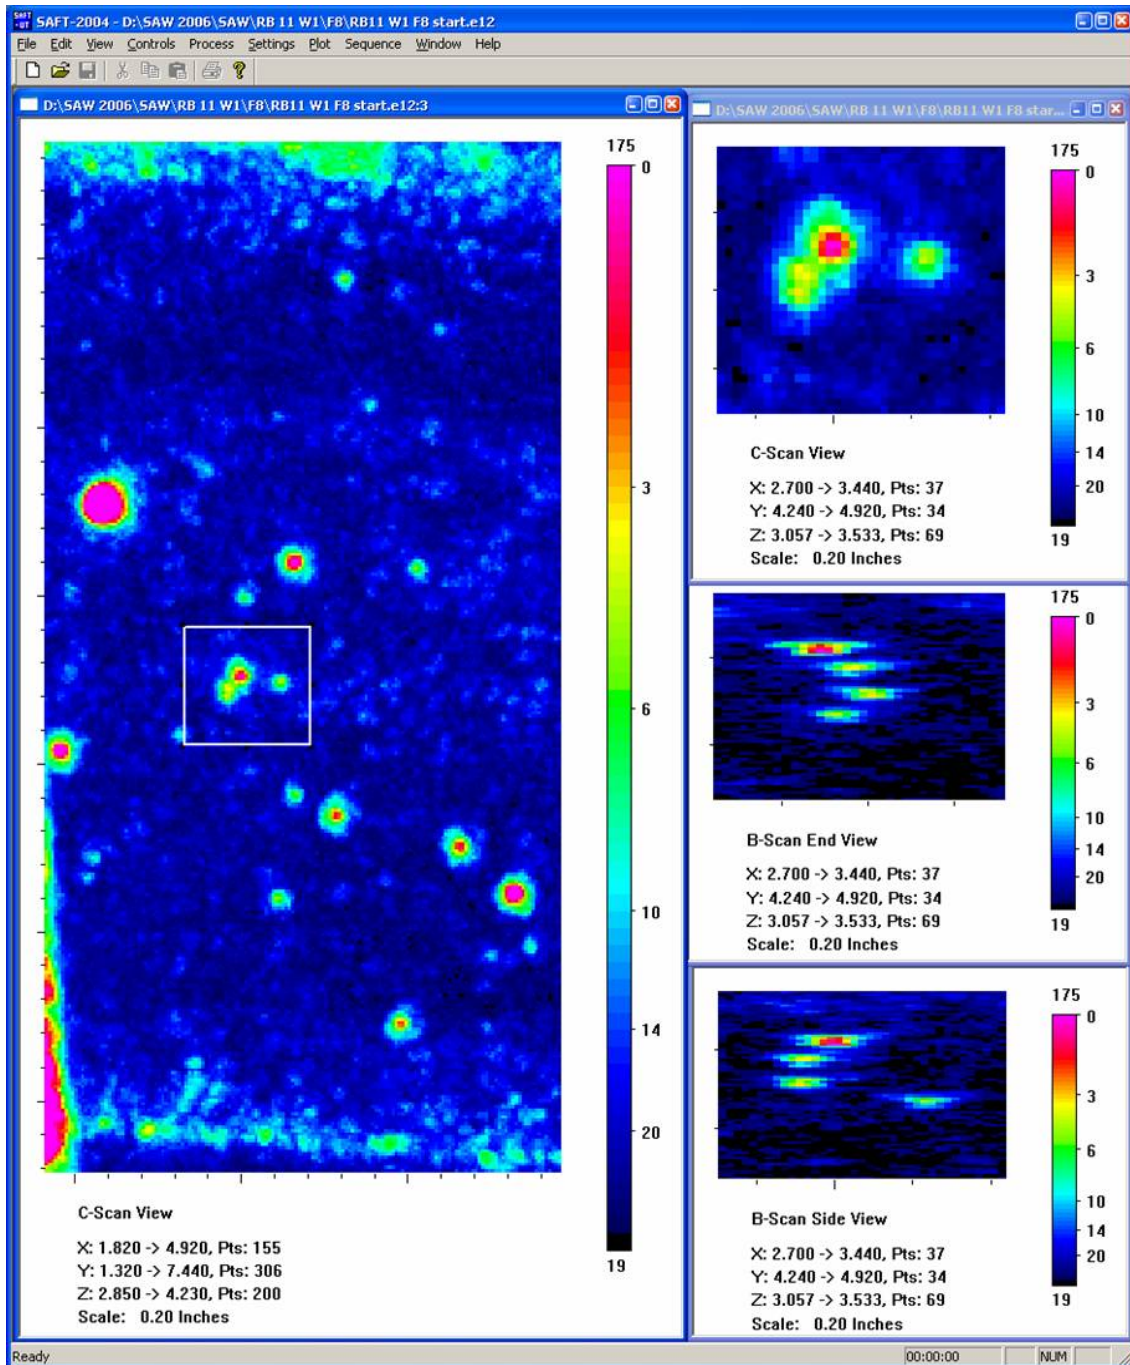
a 10 MHz F8 Immersion Testing Images of Small Fabrication Flaw: *RB5A*. This figure shows immersion testing data of a 5.5-mm flaw indication from the weld-normal testing of large weld segments. The flaw indication is identified in the box drawn in the SAFT-UT image on the left in the figure. A close up of the flaw in the C-scan view (top right) shows 2 unresolved flaws.
